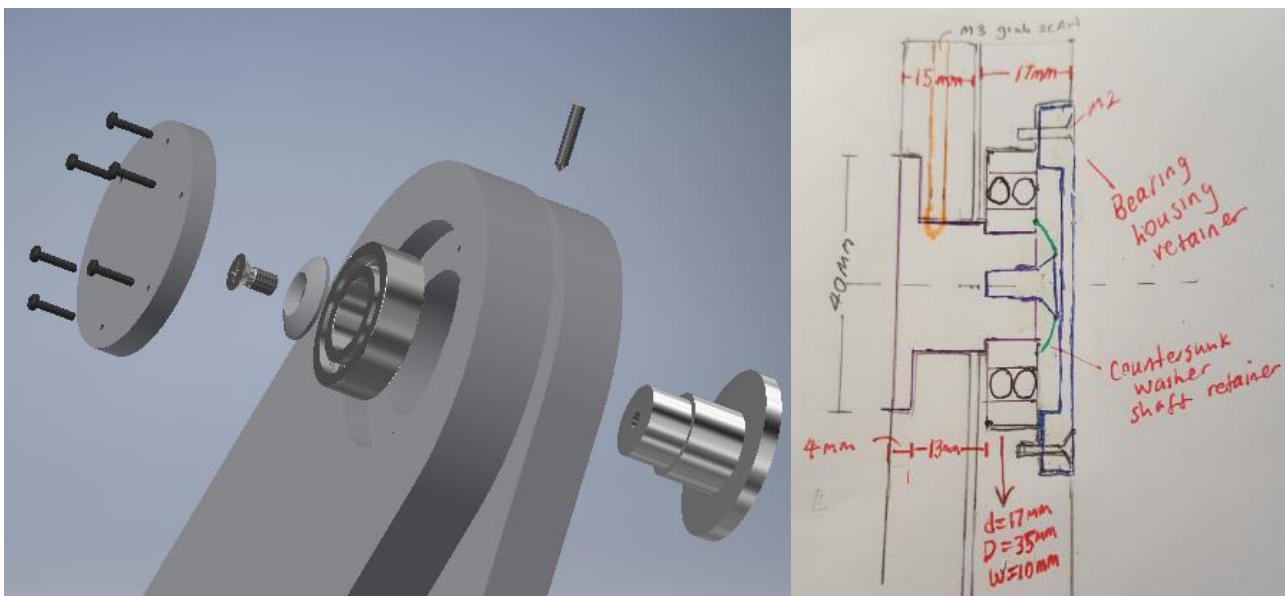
Mechanical joint for cradle rotational pivot point. Inventor model parts (left) and cross-sectional drawing of the mechanical joint (right)
